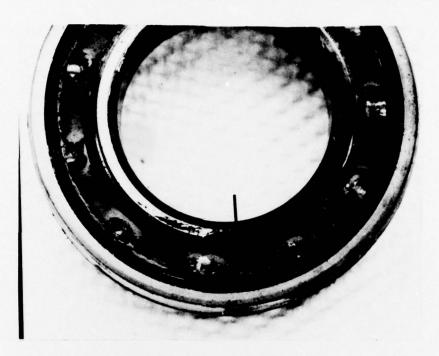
Bearing S/N TRL-31. 2x Enlarged View. Note Crack in Cage.
